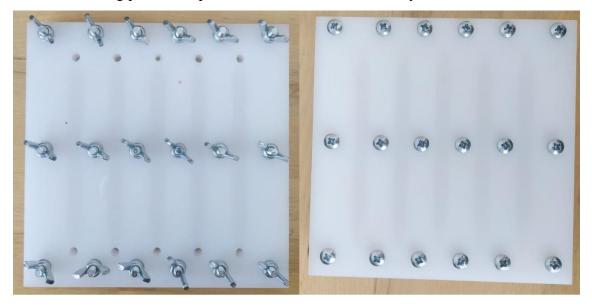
Mould after lasercutting and fastening procedures. Left: top view of the mould where the cast holes are visible. Right: Bottom of the mould.
